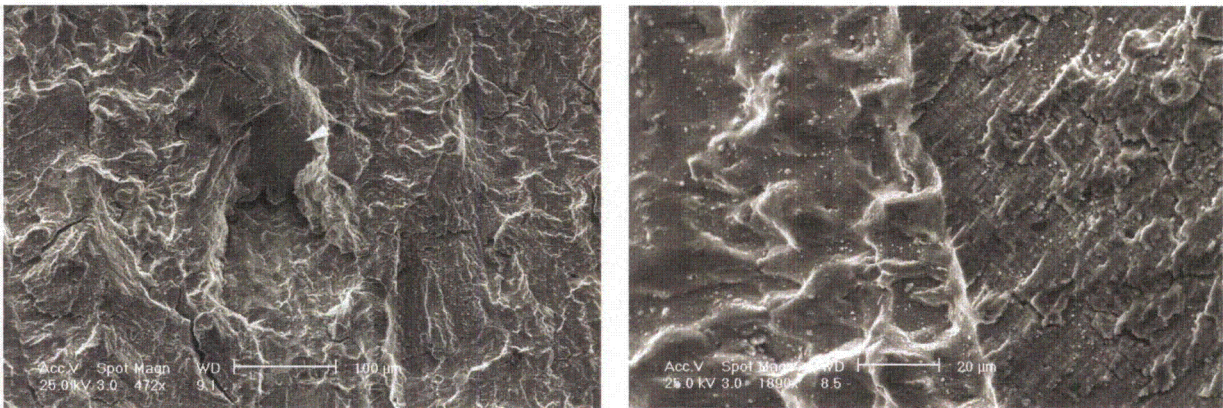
Ligaments on the fracture surface of specimen A152-TS-4: (a) out-of-plane crack and (b) interdendritic (left) and TG (right) fracture modes. Crack advance is from bottom to top.
